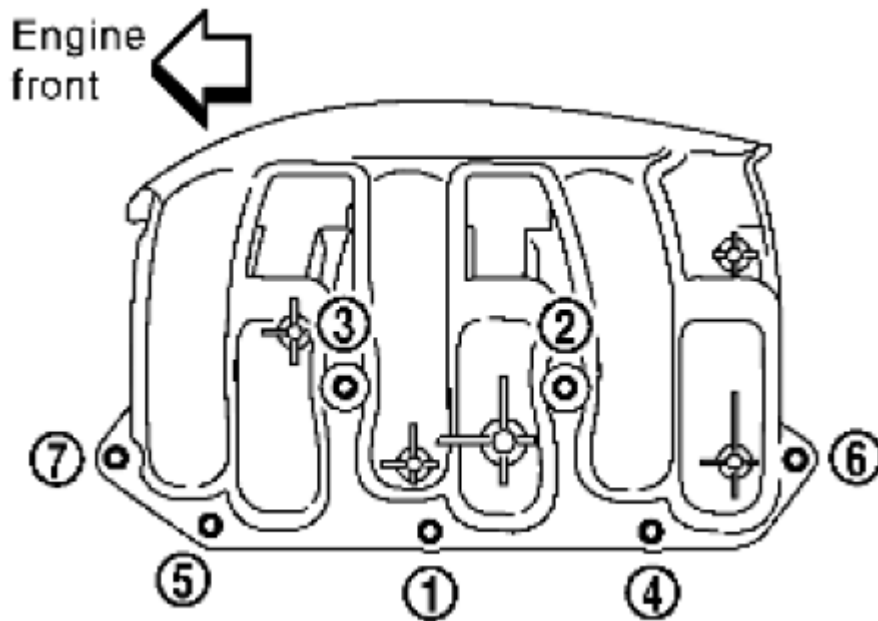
Identifying Intake Manifold Collector Bolts Loosen Sequence
